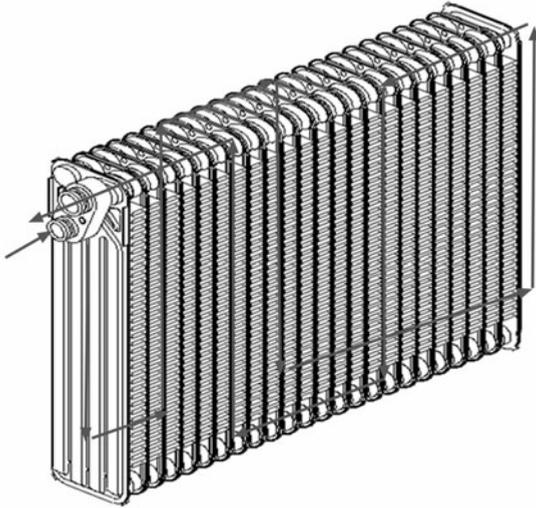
Evaporator with plates and fin, joined by vacuum brazing.
